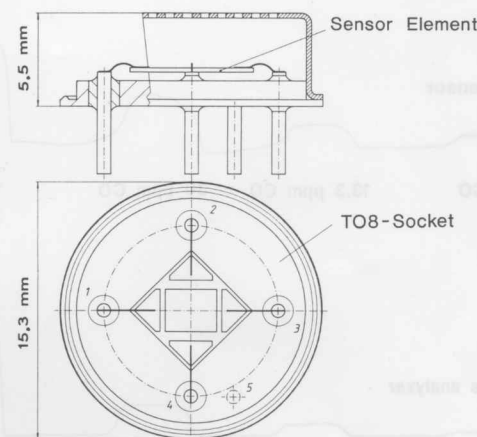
Cross section (upper part) and view (below) of the sensor structure.
